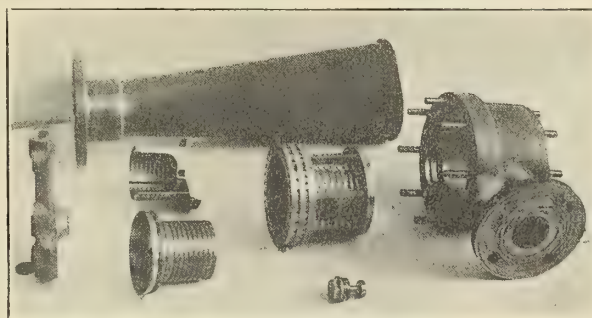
SEPARATE PARTS OF DIAPHONE
